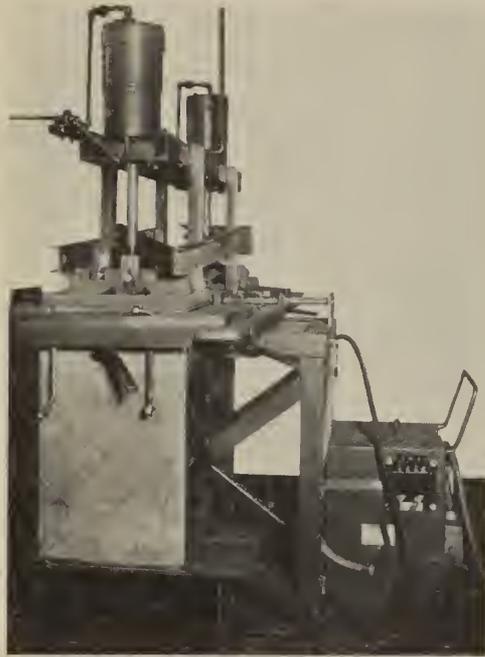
Welding Fixture and Equipment for Arc Welding Food Compartments. Welding Speeds 22 to 23 inches per minute.
